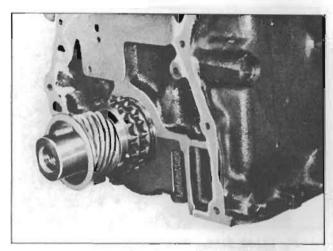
Crankshaft sprocket and distributor drive gear
